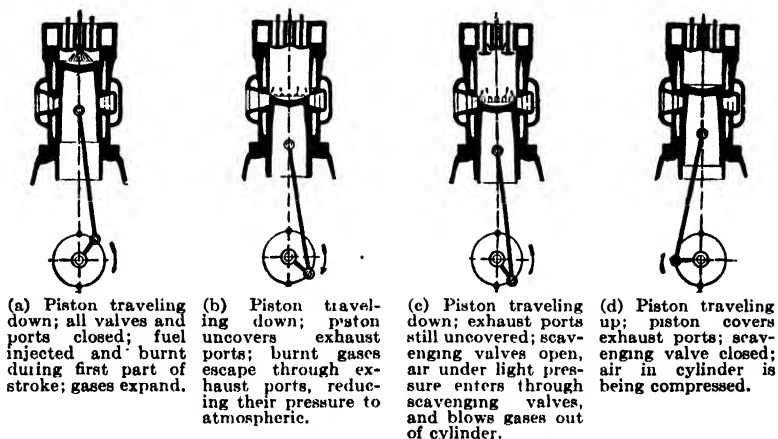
Two-cycle Diesel engine. (Courtesy of Busch-Sulzer Bros.-Diesel Engine Co.)
